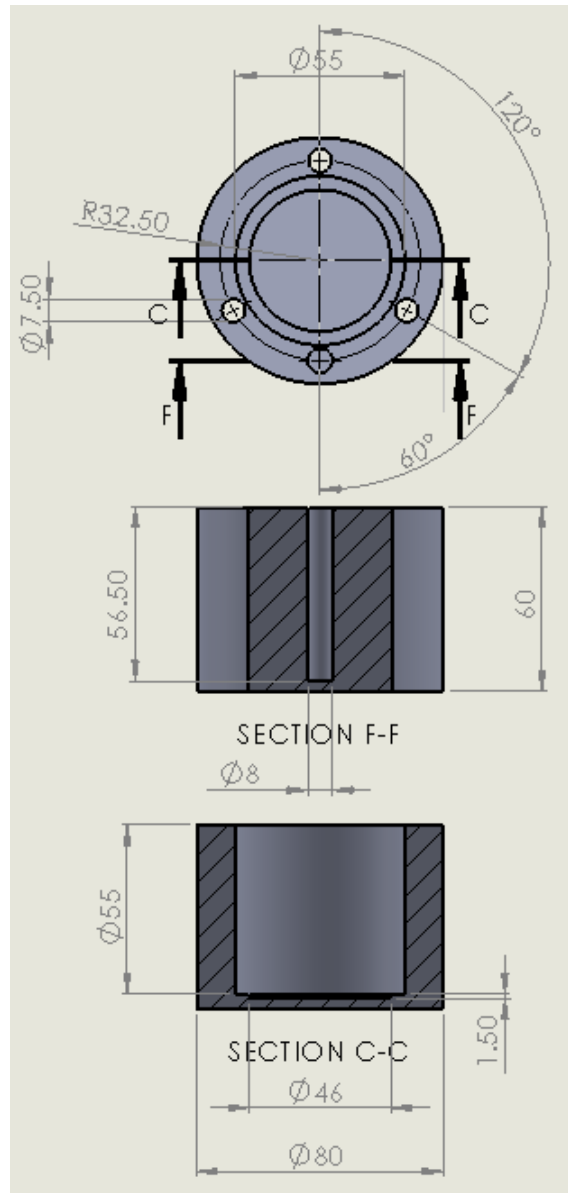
Dimensioned drawing of the secondary container to house a single 45 mm OD crucible.
